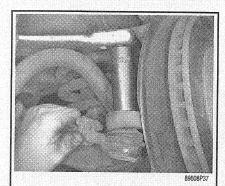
Remove the tie rod end-to-steering knuckle retaining nut
